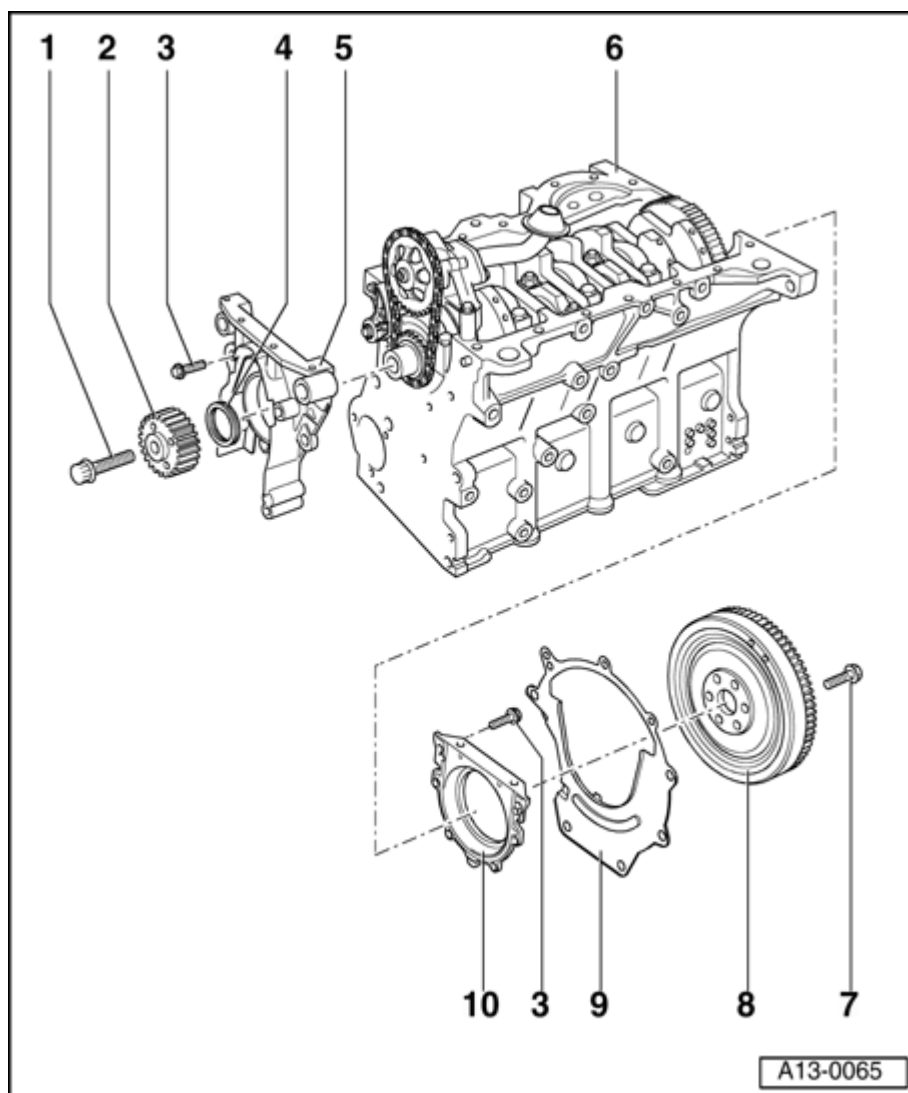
Identifying Sealing Flanges And Flywheel/Drive Plate
